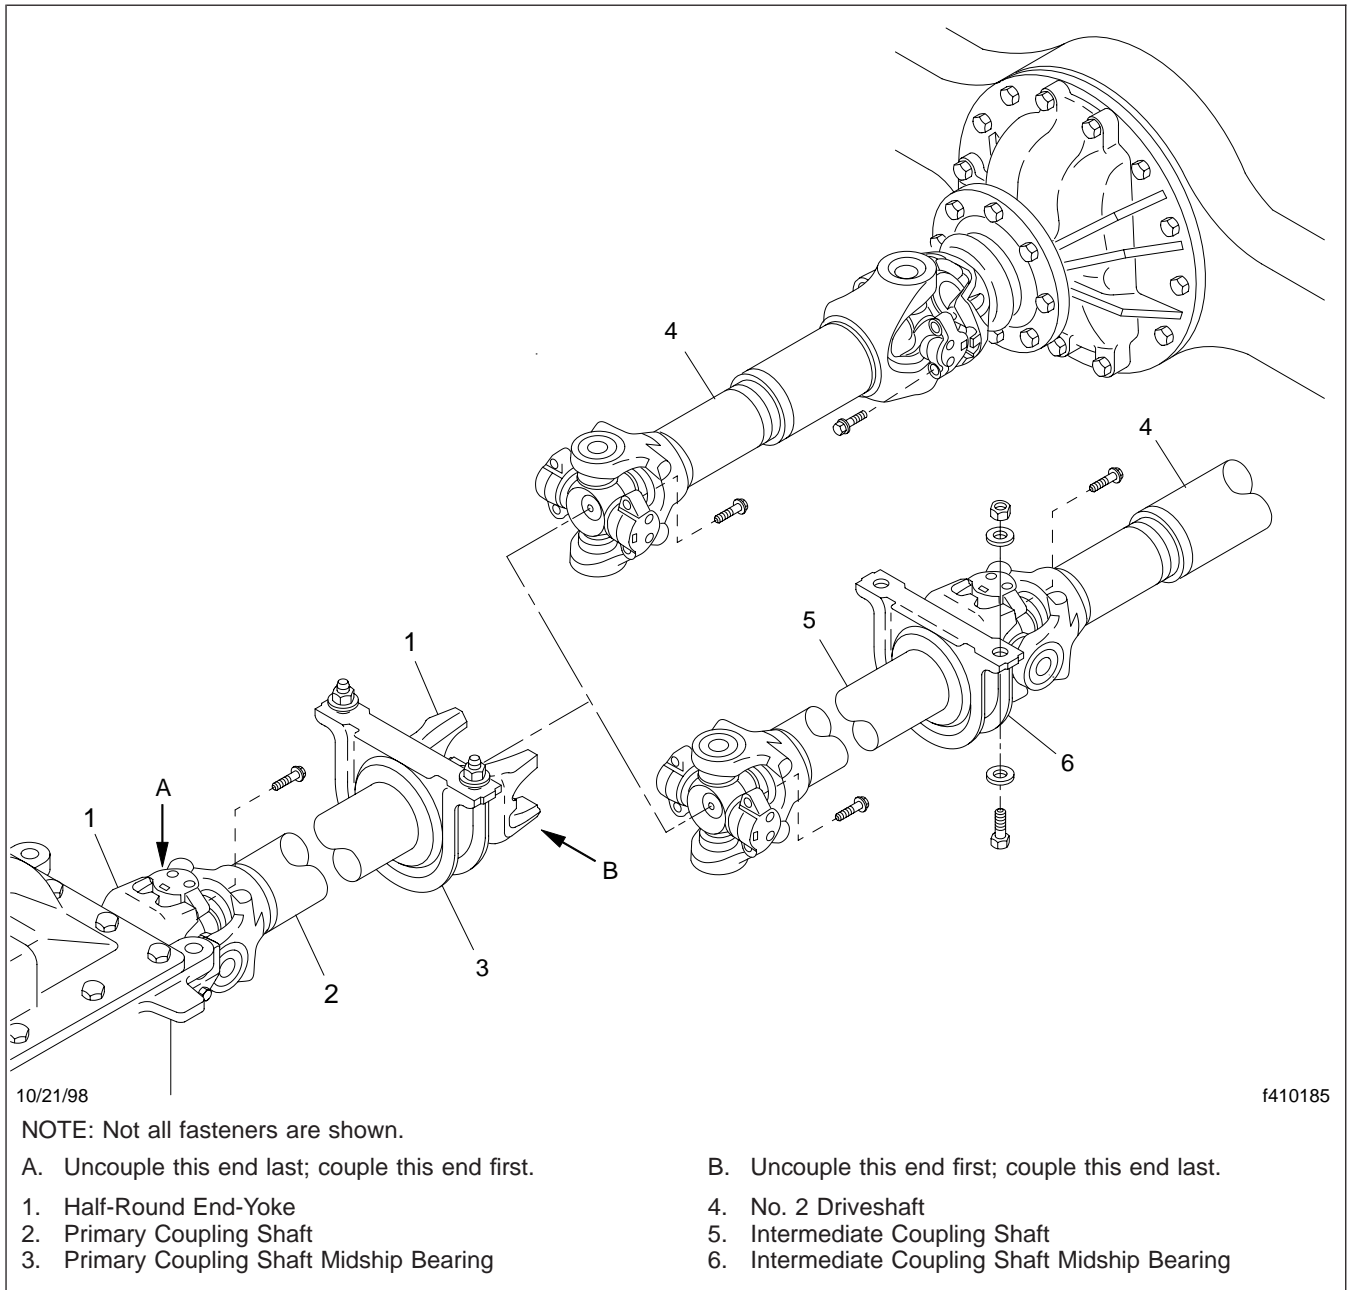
, Removal/Installation of a Primary Coupling Shaft With RPL U-Joints
